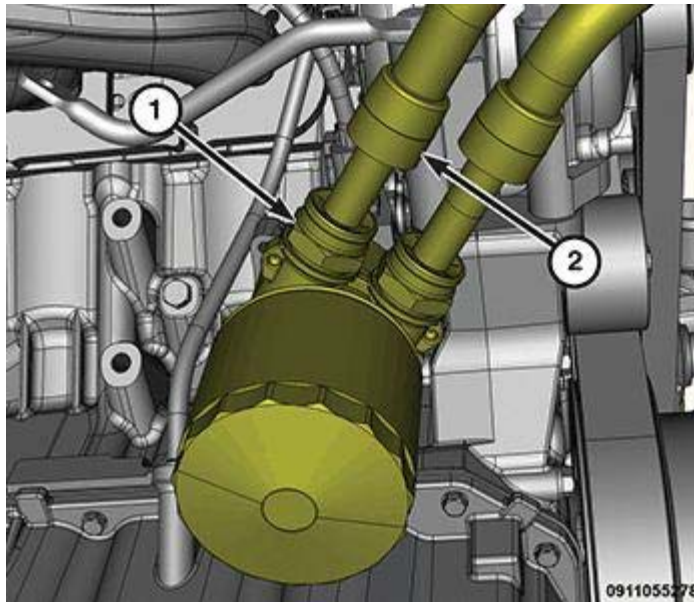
Oil Filter Adapter Quick Connectors & Oil Cooler Hoses
